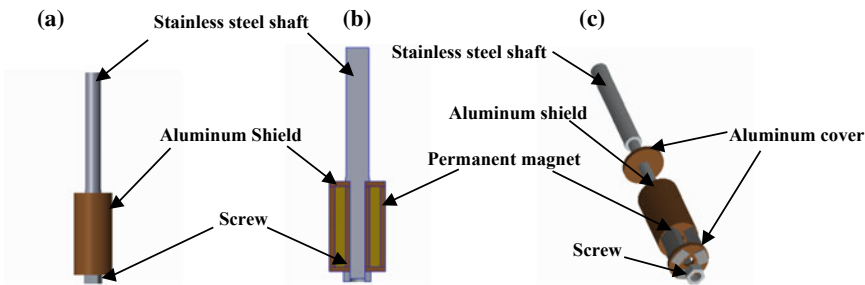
CAD model of magnetorheological honing (MRH) tool a complete assembled tool, b cross section view of the tool, and c exploded view of the tool
